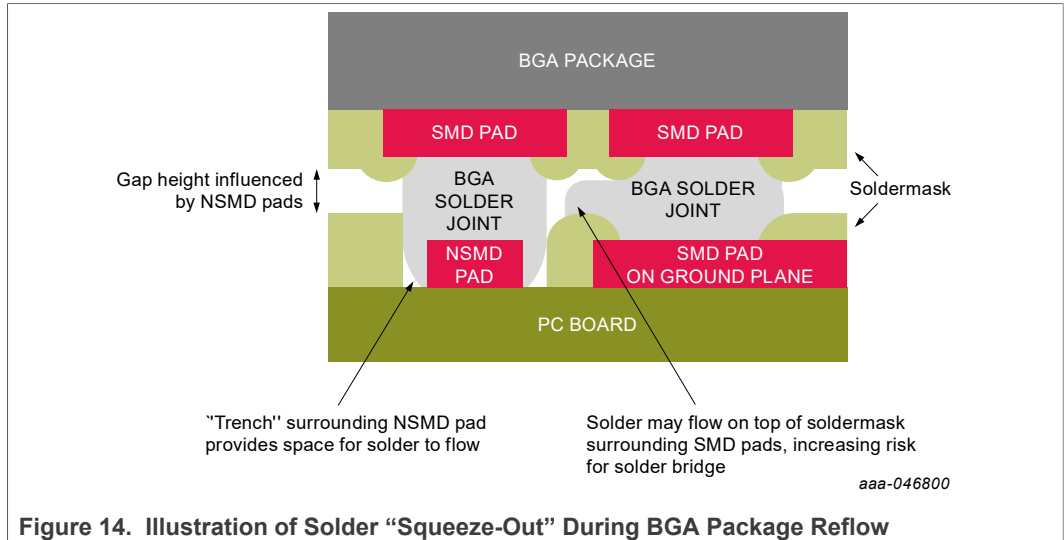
Illustration of Solder “Squeeze-Out” During BGA Package Reflow
